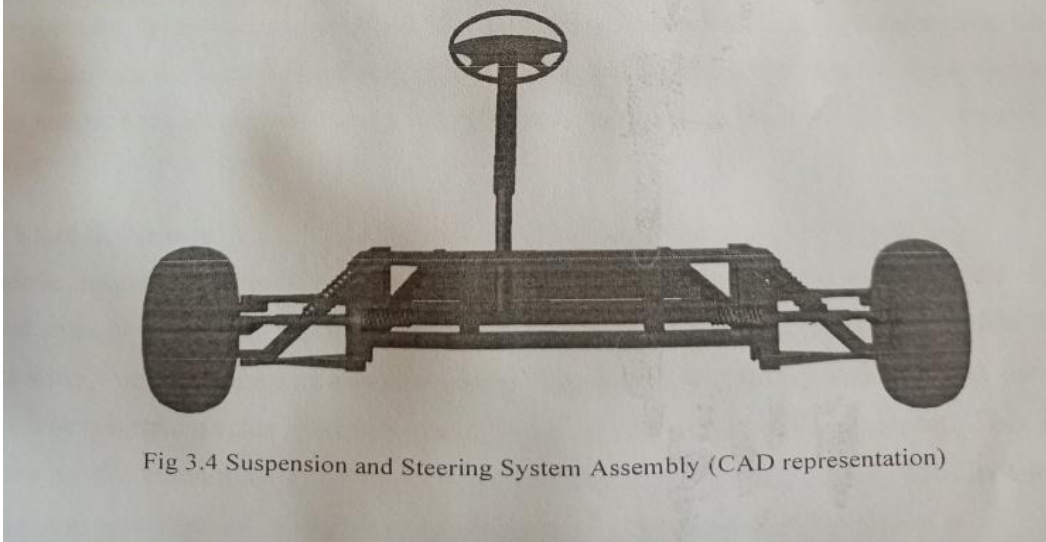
Suspension and Steering System Assembly (CAD representation)
